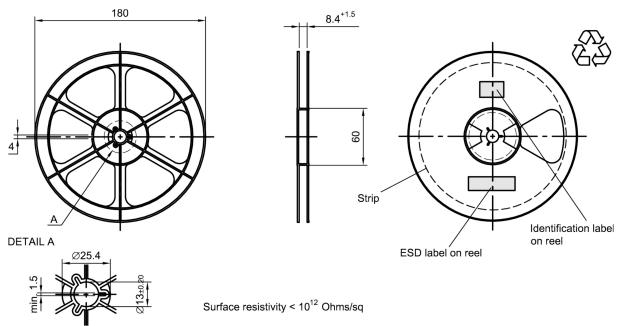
Drawing of reel (first-angle projection) with diameter of 180 mm.
